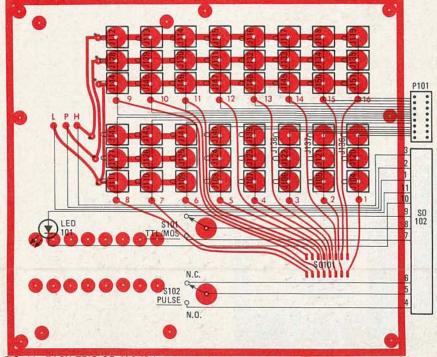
EACH TRIO OF JACKS is connected to the appropriate pin of the test socket SO101. Separate 11-wire cable goes to SO102, which mates with P102.
